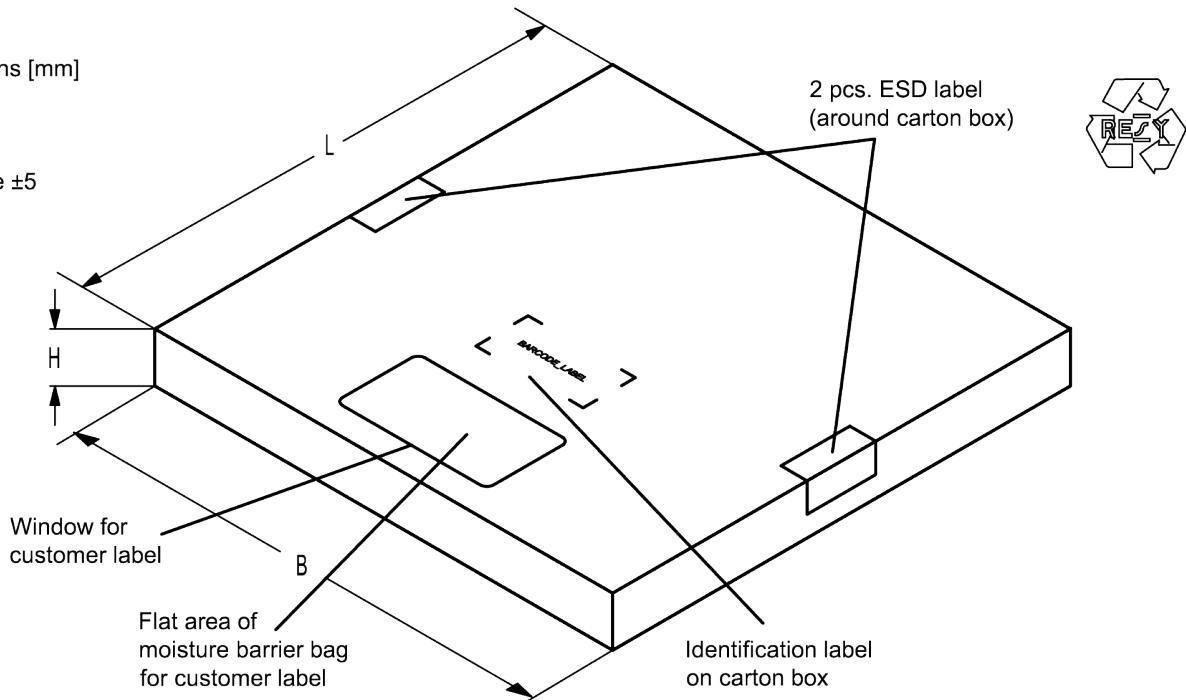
Drawing of folding box for reel with diameter of 180 mm.
